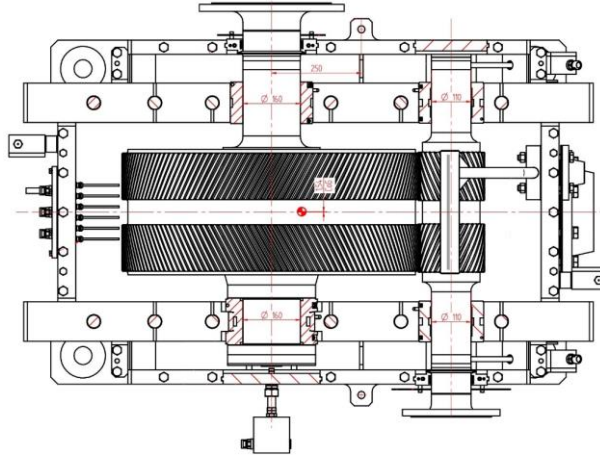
The cross-sectional drawing of the double-helical speed increaser gearbox, studied in this paper.
